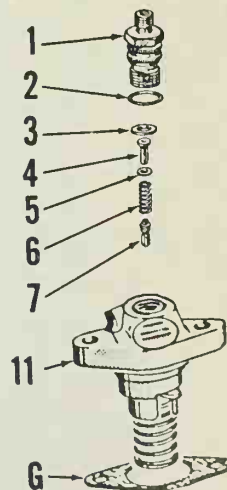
Partial exploded view of fuel injection pump. Injection timing is adjusted using shim gaskets (G).
